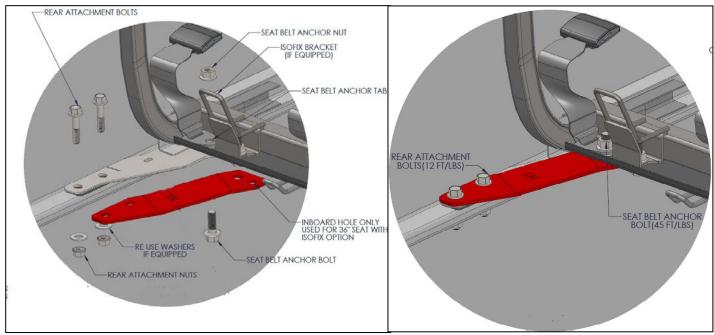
Bracket Installation (Driver's Side Shown) - 26 Inch, 36 Inch, and 39 Inch Seats
